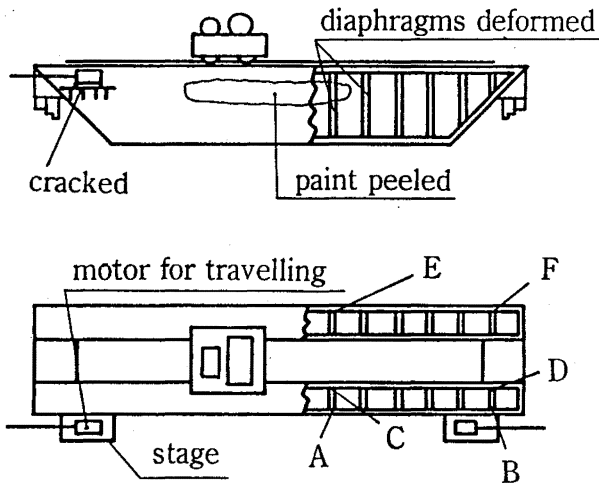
Damage of the girder and locations of strain gages bonded on the girder(A~F).
